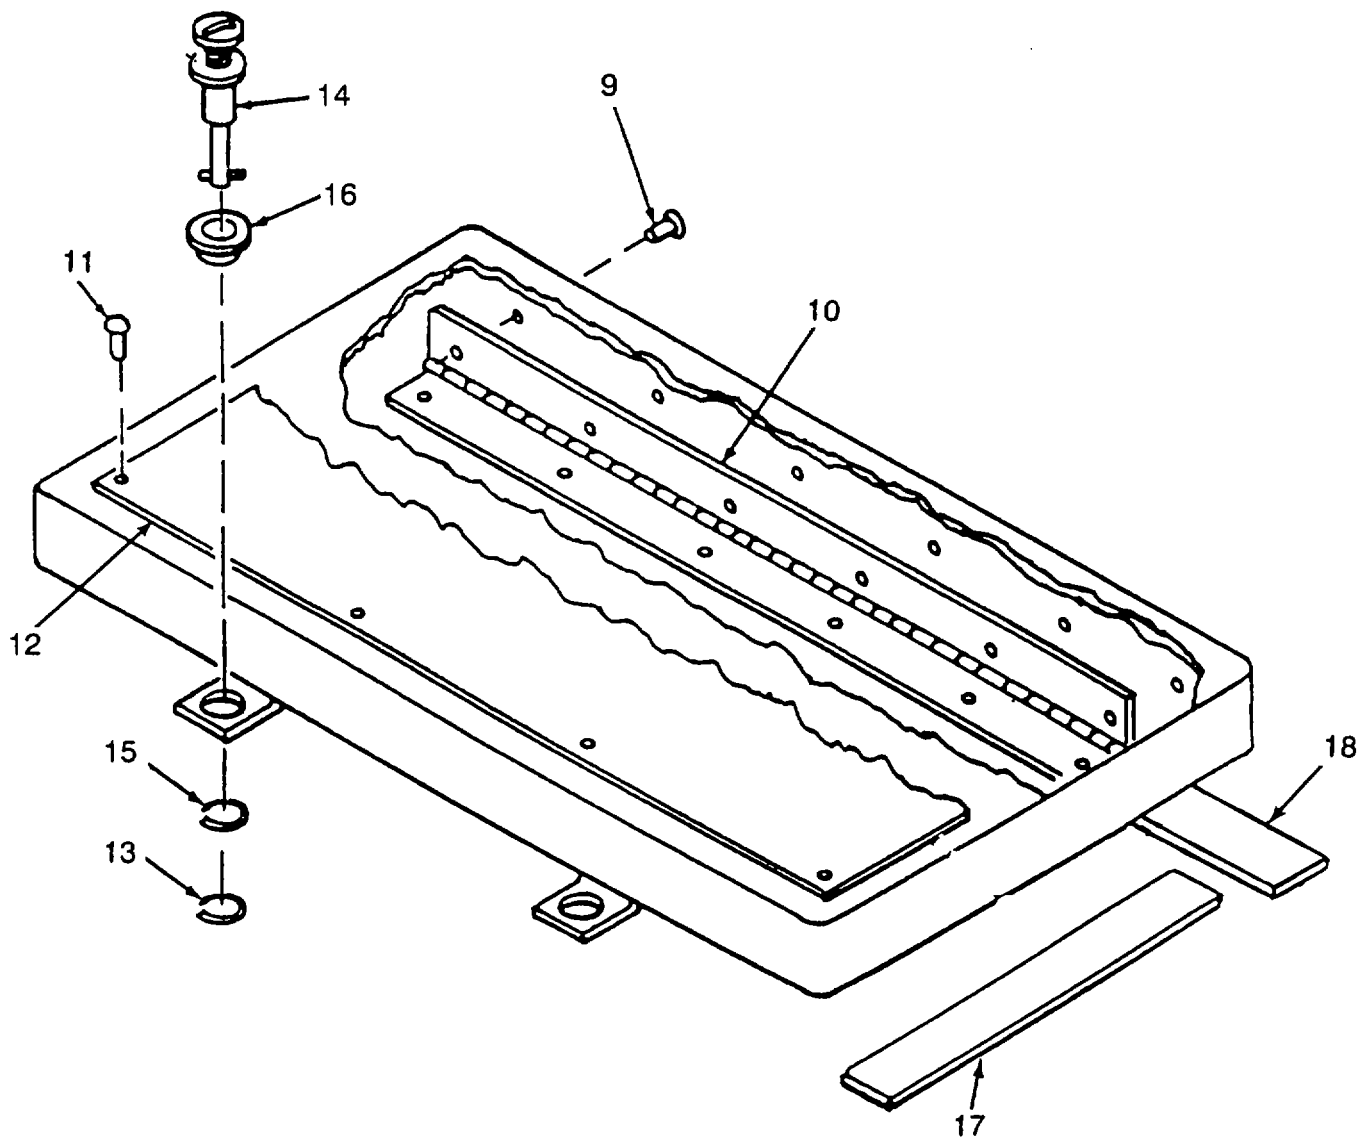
Control Box Disassembly (Sheet 2 of 2)
